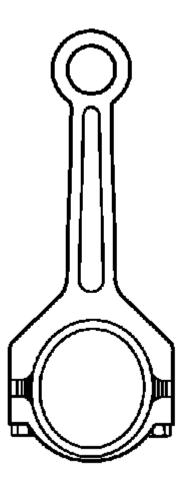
View Of Connecting Rod Courtesy of GENERAL MOTORS CORP.
